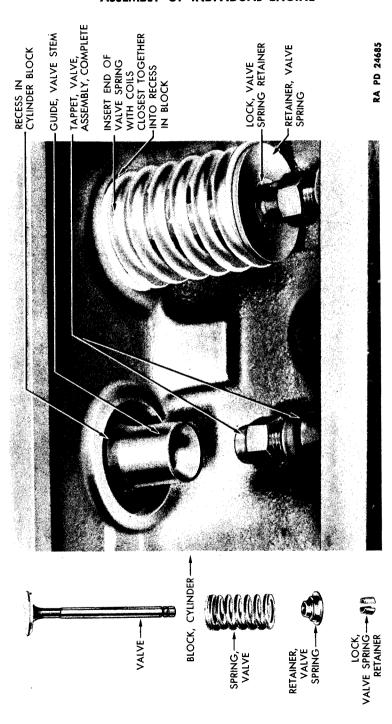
Correct Installation Of Valve Spring, Retainer And Locks
